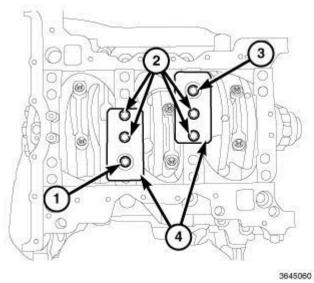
Bedplate Removal Tools & Bolts Courtesy of CHRYSLER GROUP, LLC
